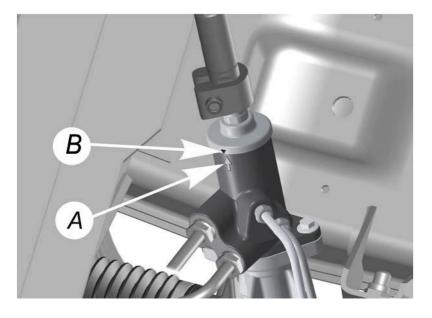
Adjustment marks on the steering gear: A – mark on steering gear boss; B – mark on input shaft cover
